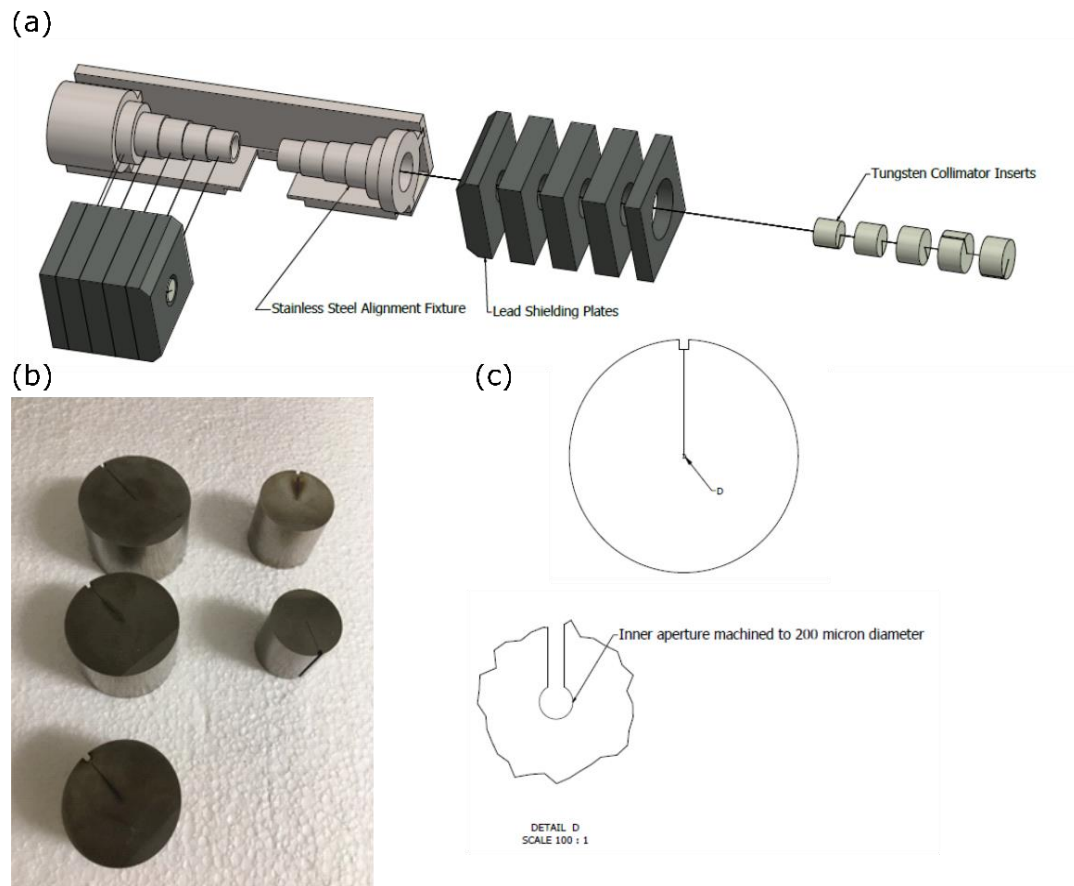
Pencil-beam collimator design. a) assembly of a pencil-beam collimator b) Tungsten sections with varying diameters made through wire-EDM c) Drawing illustrating the cuts made in tungsten section using wire EDM. The inner diameter in detail D is 200  $\mu\text{m}$ . [108]
